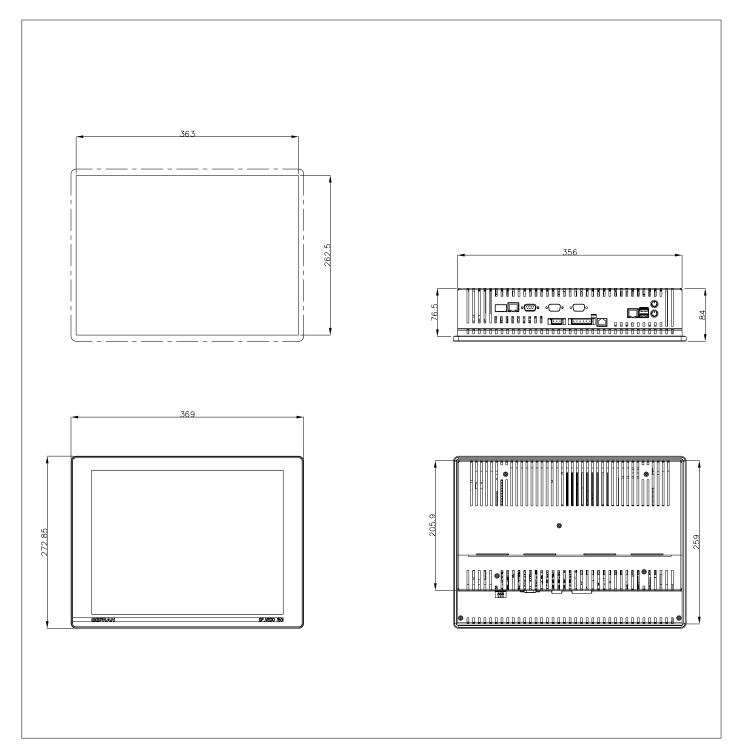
Dimensions and cut-out GF_VEDO HL 150CT
